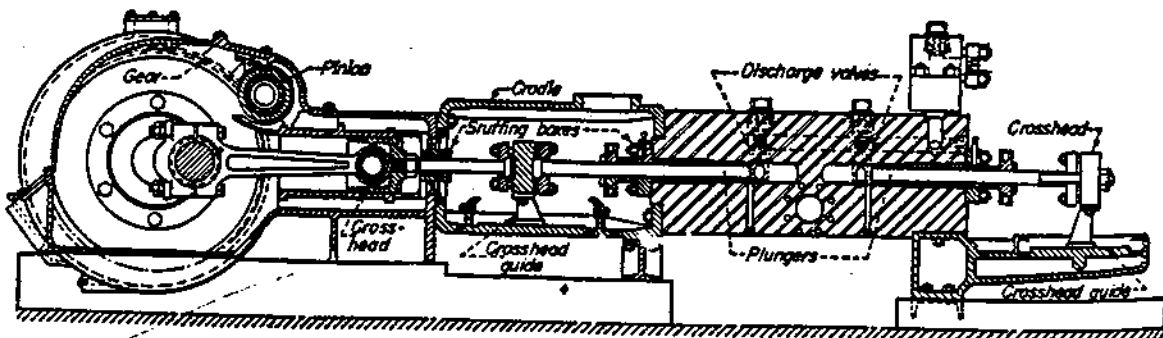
Cross section through a large enclosed-crankcase power pump with forged-steel liquid cylinders.
